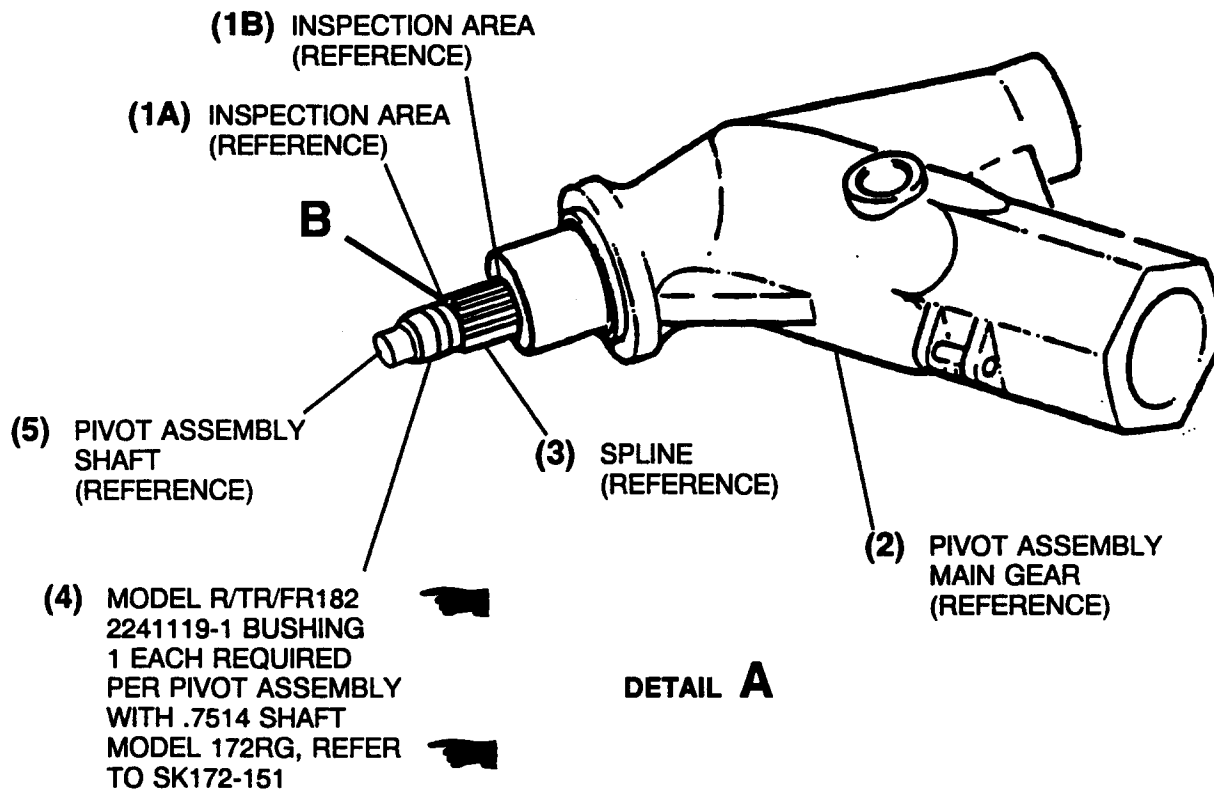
Main Landing Gear Pivot Assembly (Sheet 1 of 2)
